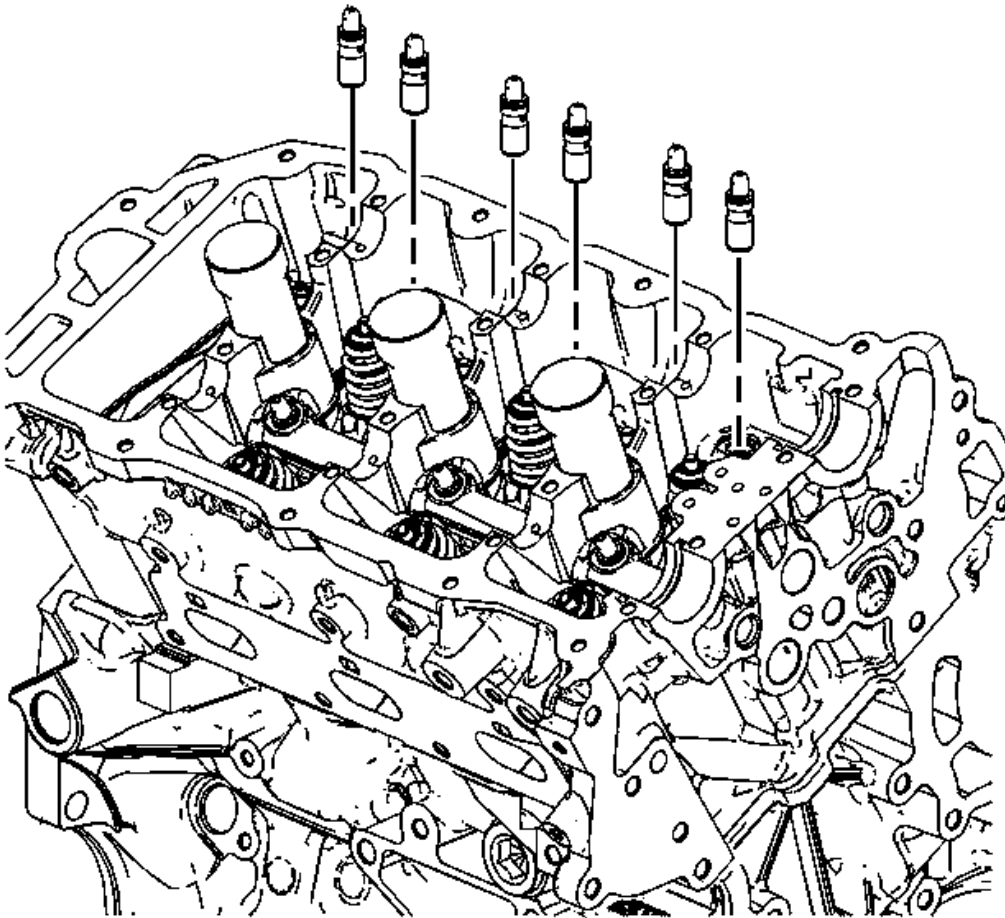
View Of Stationary Hydraulic Lash Adjusters
